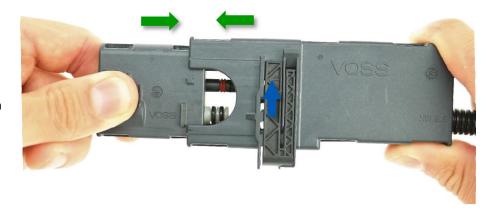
Merged plug and coupling side of QC system 301 EFSP2
